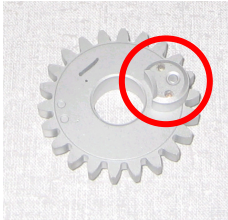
Examples of sinter brazed powder metal parts, with braze plug locations marked by red circles.
